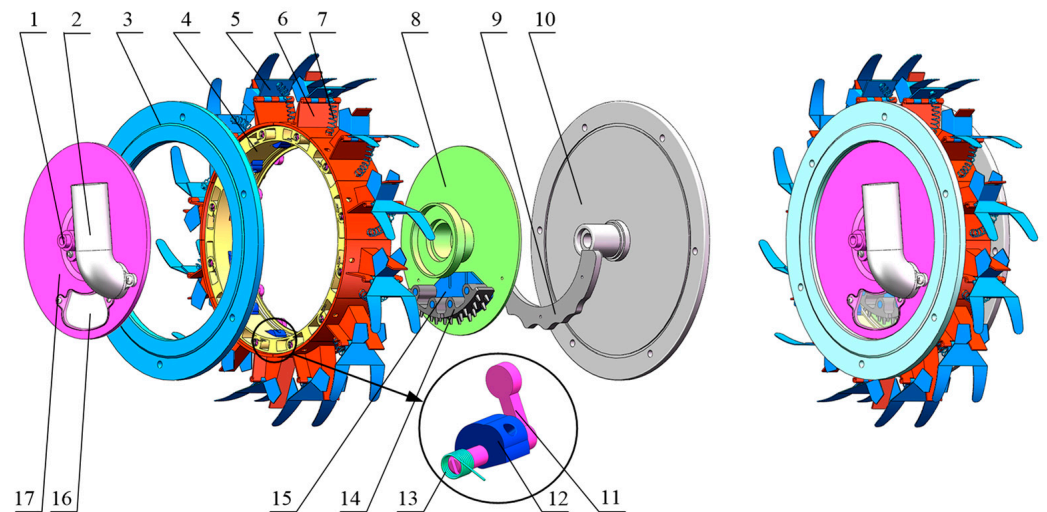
Structure of the rotary type-hole dibbler. (1) Shaft, (2) seed tube, (3) dynamic ring, (4) waist belt, (5) duckbill dynamic plate, (6) spring, (7) duckbill fixed plate, (8) fixed plate, (9) gear plate, (10) moving plate, (11) shifter, (12) type-hole wheel, (13) torsion spring, (14) disrupter, (15) disrupter support frame, (16) sight hole cover plate, and (17) end cover.
